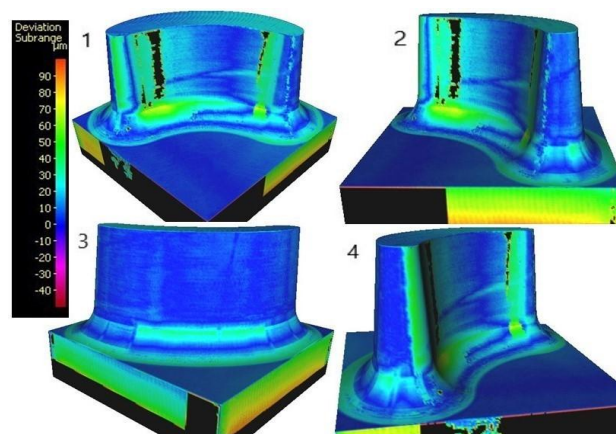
Comparison of the original model with the workpiece after 3axis milling (tool path tolerance $10\mu\text{m}$ -Check section)
